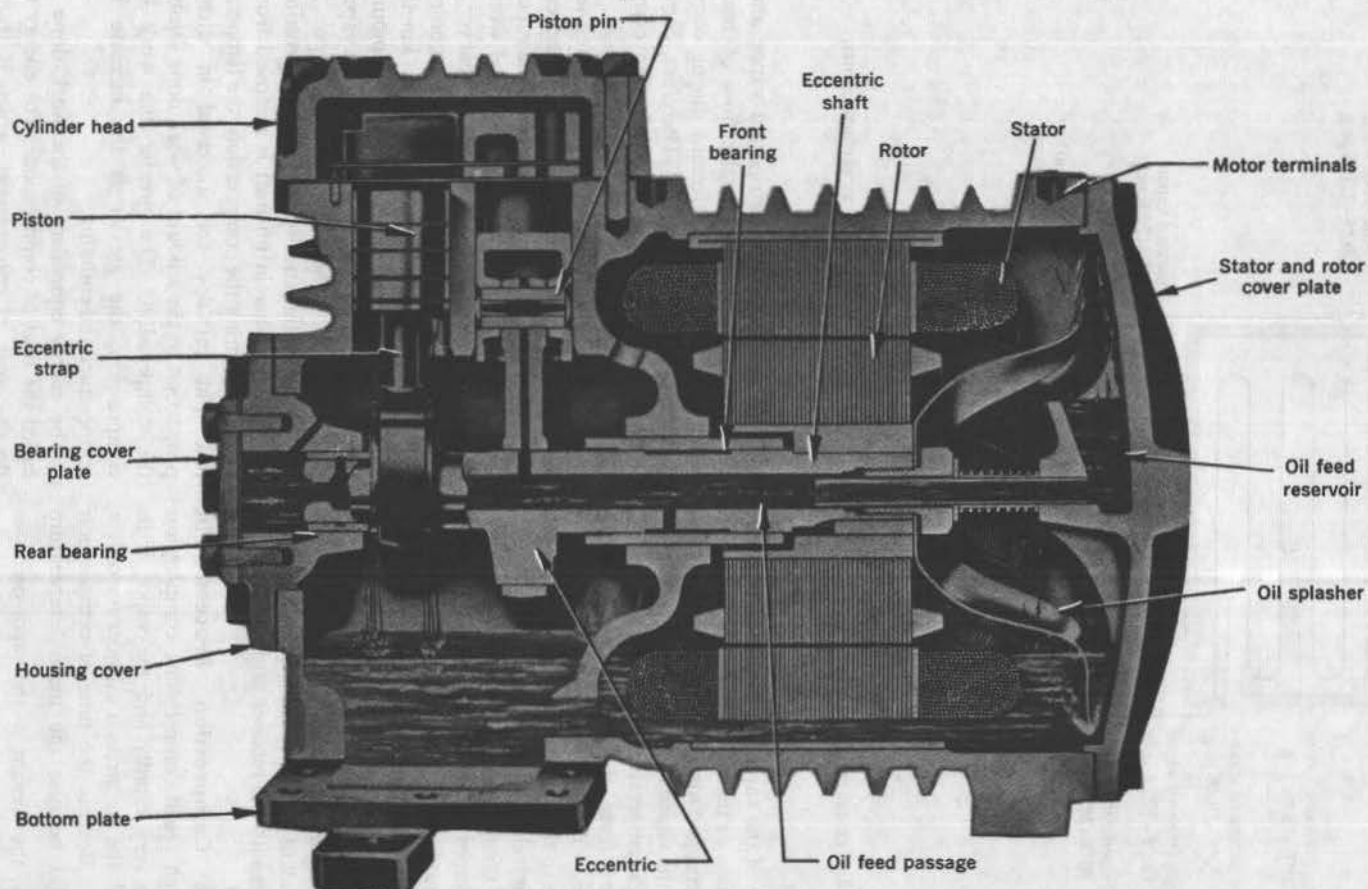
Typical twin cylinder compressor—cutaway view illustrating bolted construction of “accessible hermetic” type motor-compressor unit. (Courtesy Carrier Corporation.)
